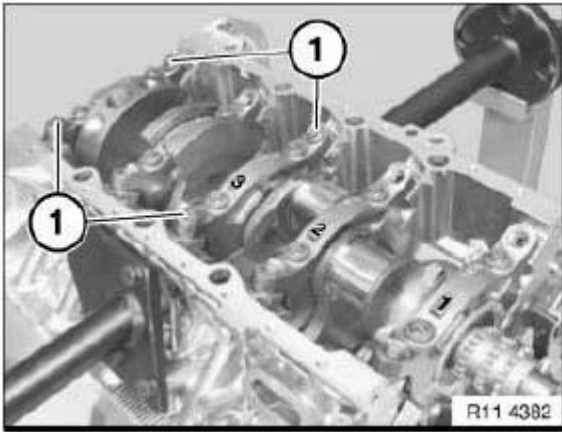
Identifying Main Bearing Inclined Screw Connection
